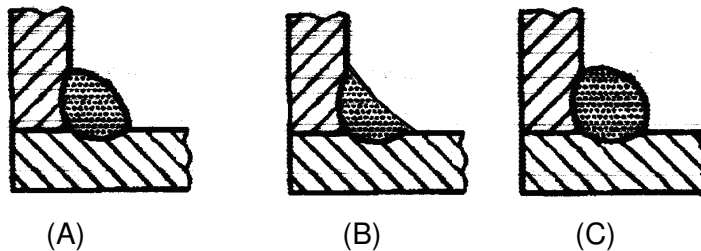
Unacceptable weld profiles of groove joint.
